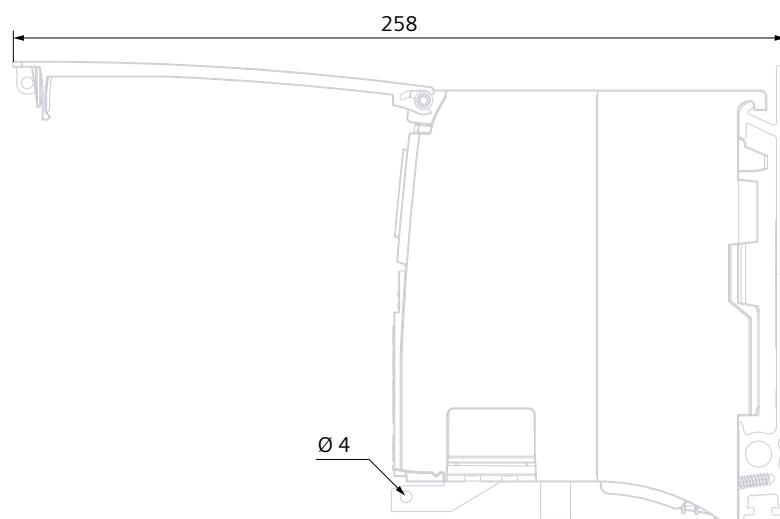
Dimensional drawing of CPU 1511-1 PN, side view with front panel open
